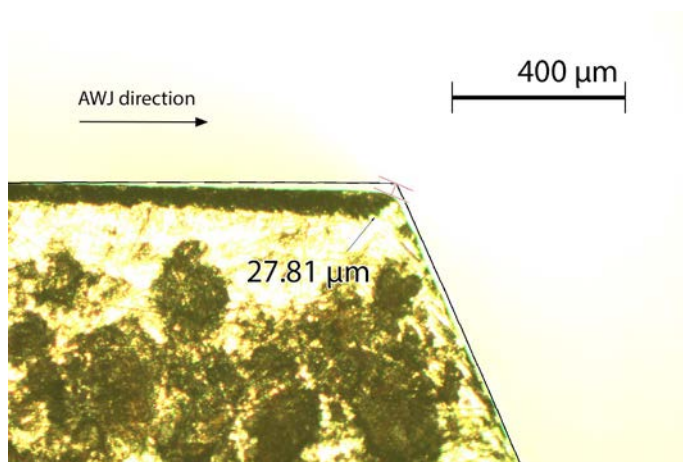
Figure M. Bottom geometry, feed rate 11 mm/s, tooth right side, gear B
